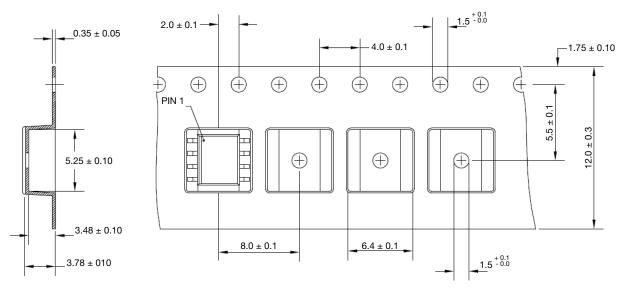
Tape and Reel Packaging (2000 pieces on reel)
